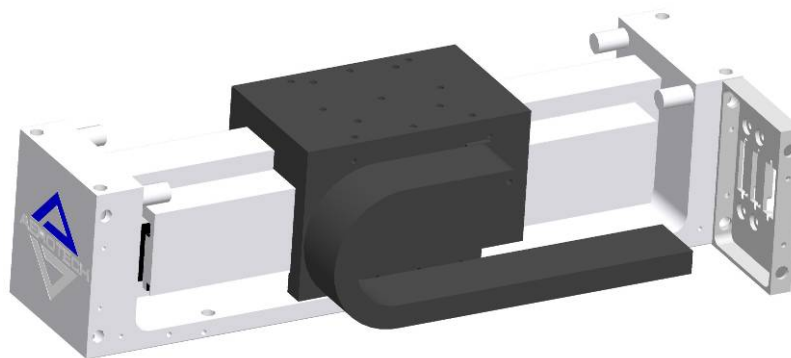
Single Axis Robot for Sequential Laser Positioning
